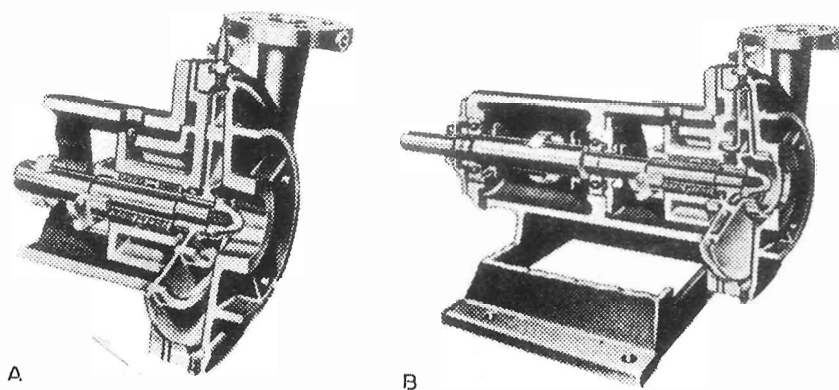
Chemical pumps. (A) Semiopen impeller. (B) Closed impeller. (Peerless Pump Division, FMC Corp.)
